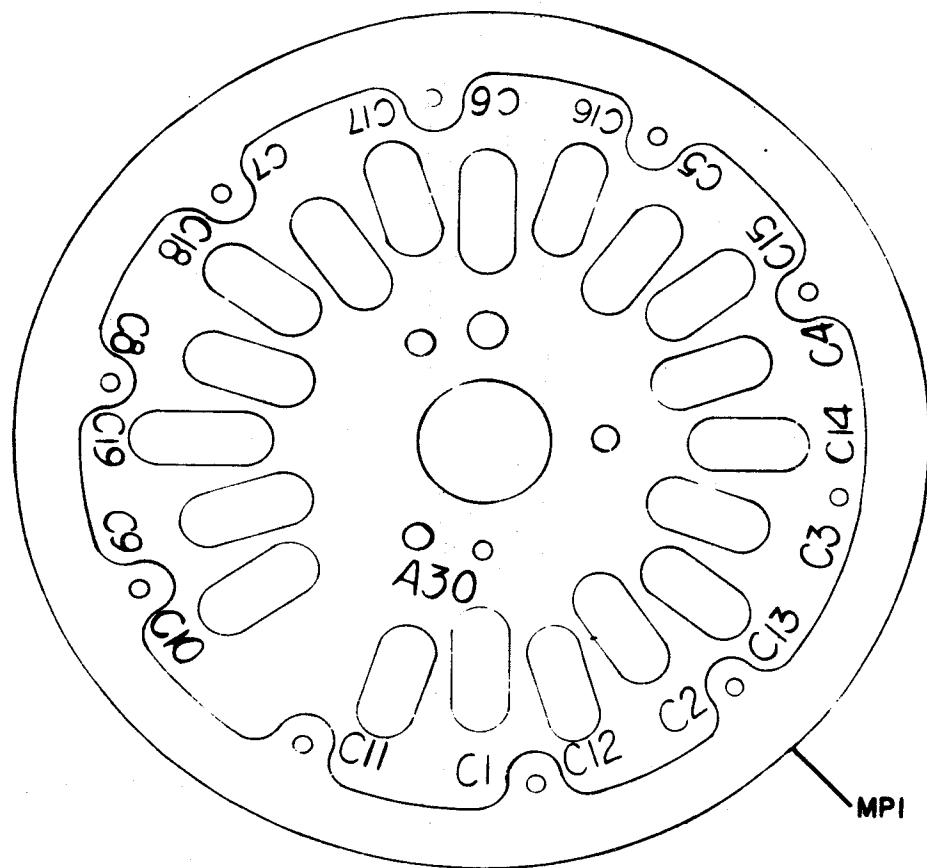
100 kHz Rotor Subassembly A2A4A30, Component Locations
